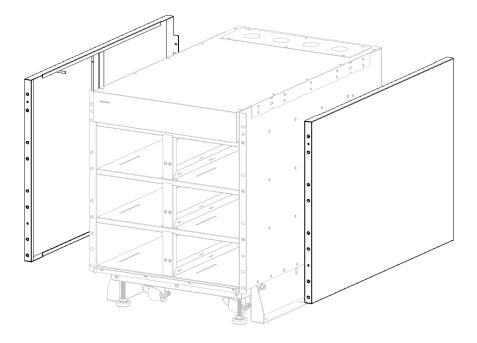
Removing the Battery Cabinet Side Panels, Front View
